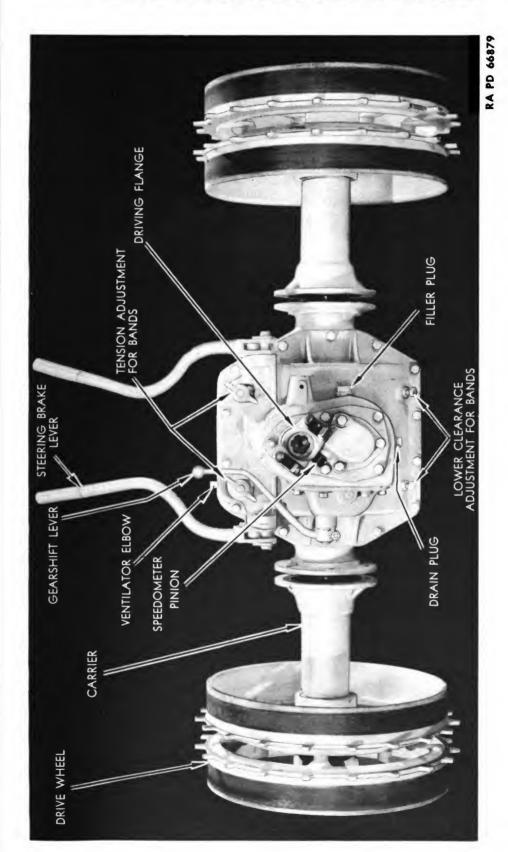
Controlled Differential and Transmission Assembly with Final Drive Assemblies
